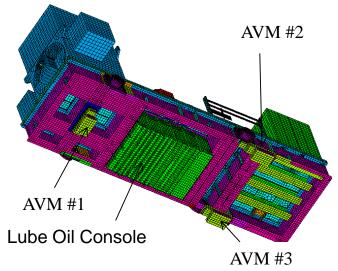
FPSO base package with lube oil console under the gear to reduce deck area required – bottom view.
